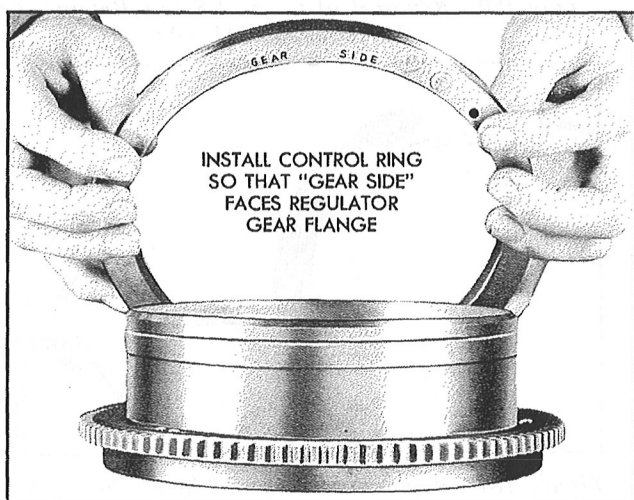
Assembly of the Regulator Gear, Models A632S-C1, -B1, -B5
